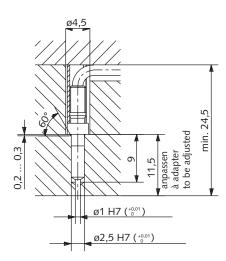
Mounting Type 6193B... with spacer sleeve Type 6464A3
